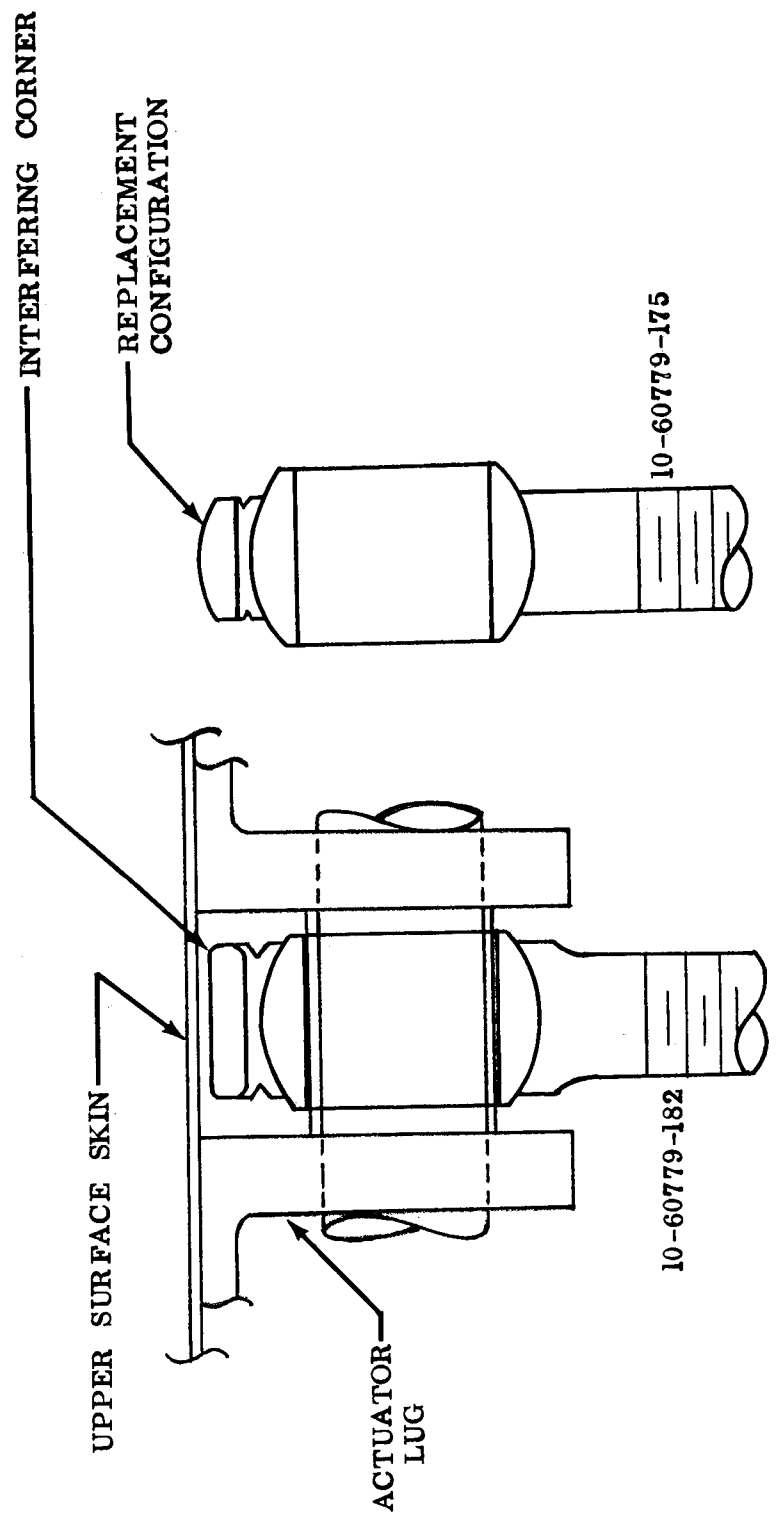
ACTUATOR ROD END GEOMETRY
